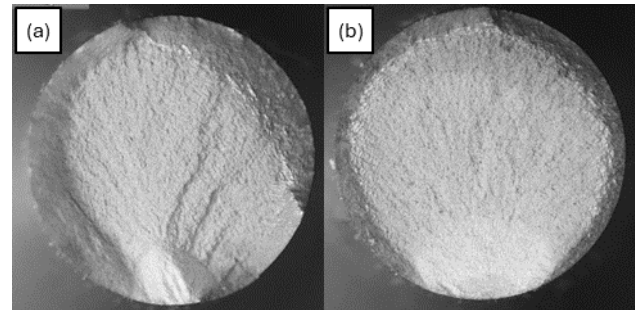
R=0.1 forged plate 2009/SiC/15p axial fatigue fracture surfaces for coupons failing at (a) 1.7x10⁴ cycles, and (b) 4.3x10⁶ cycles.
